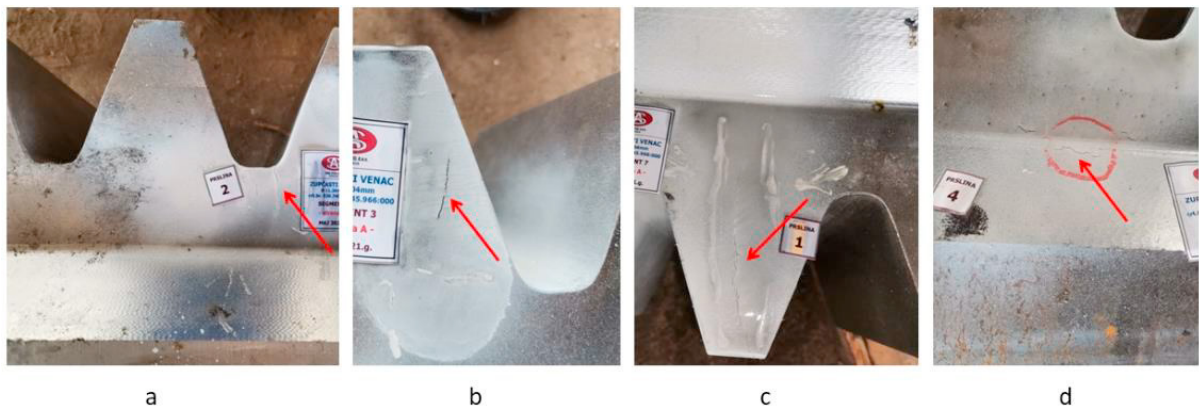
(a) crack length of 25 mm between gears' teeth; (b) crack length of 30 mm on one of tooth surface; (c) crack length of 110 mm on one of tooth surface; (d) crack length of 10 mm on gear body (ring).
